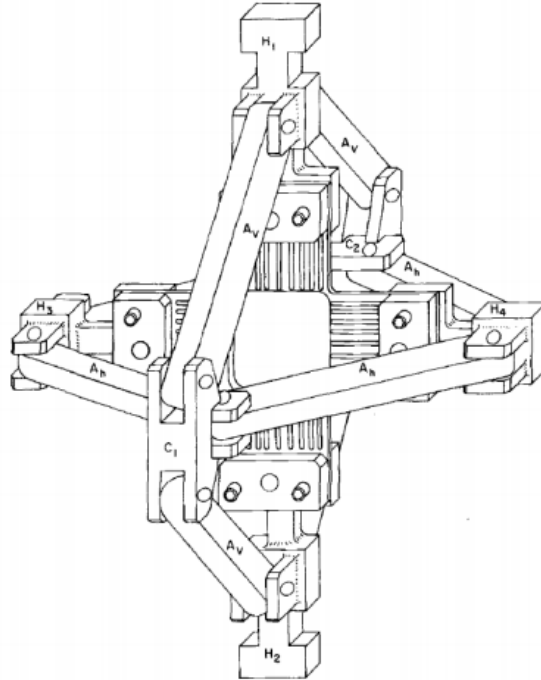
Link mechanism attached to a conventional uniaxial tensile test machine [103]
